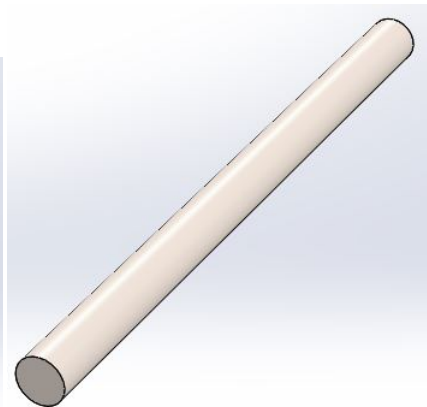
Pneumatic Multiplier Cylinder Of The Machine
